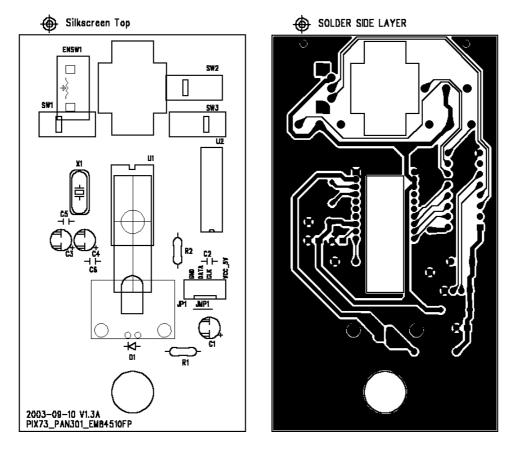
Example printed circuit board layout. (PAN301ASI-20X V.S EM84510FP)
